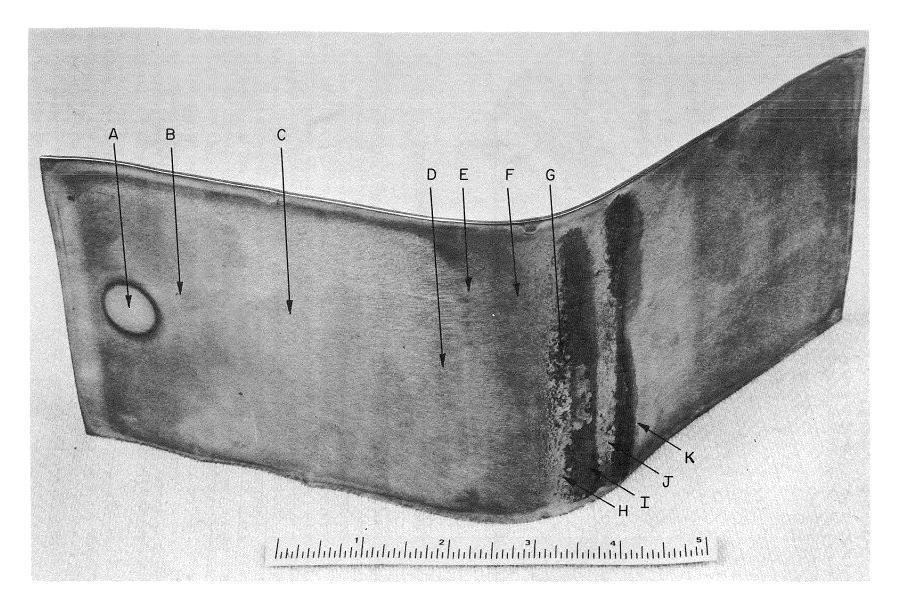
STAINLESS STEEL BASE PLATE SHOWING RESULTS OF CURVED-PLATE WELDING EXPERIMENTS
